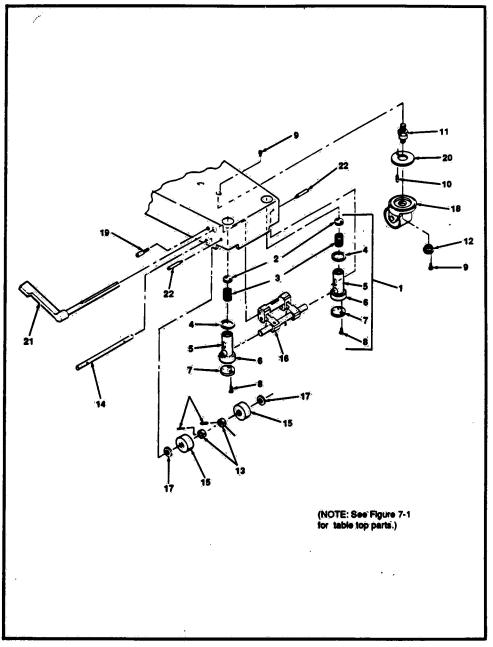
T-BASE ASSEMBLY, FRONT.
